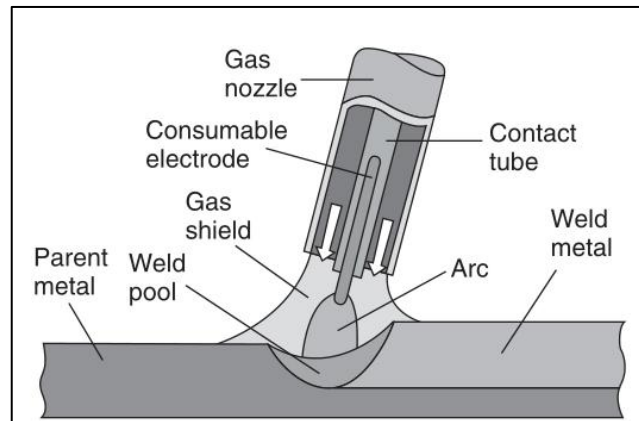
Sketch of the basic principles of the gas metal arc welding (GMAW) technique[19].
